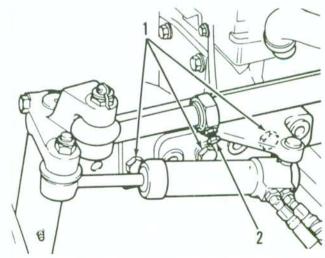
View of axle left end typical of 340-360 models. Track adjusting screw and lock nut (2) and cylinder bracket and axle extension screws (1) must be properly installed and tightened.
